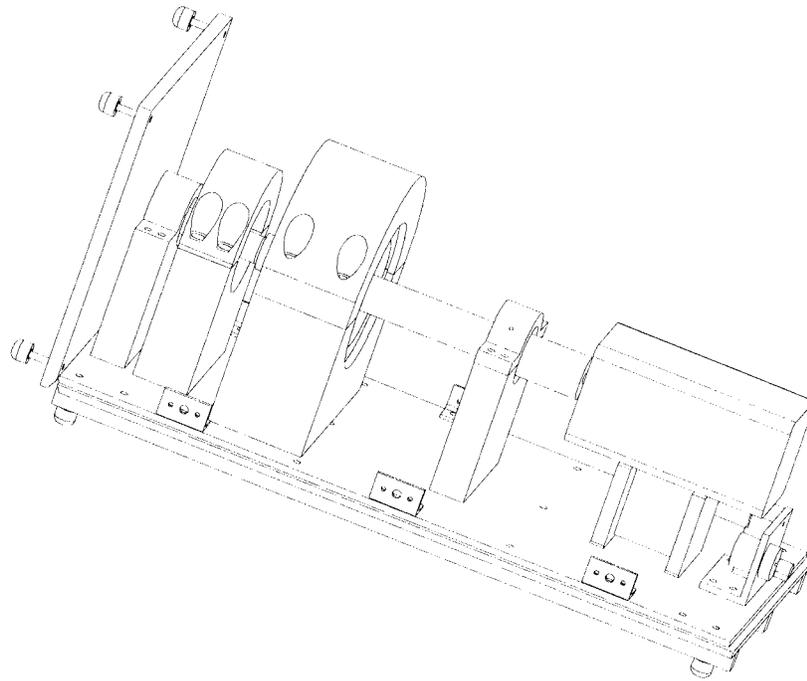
Student-produced assembly drawing of advanced bearing test rig.
